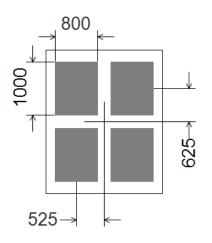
Stencil opening example for inner thermal pads (dimensions in  $\mu m)$
